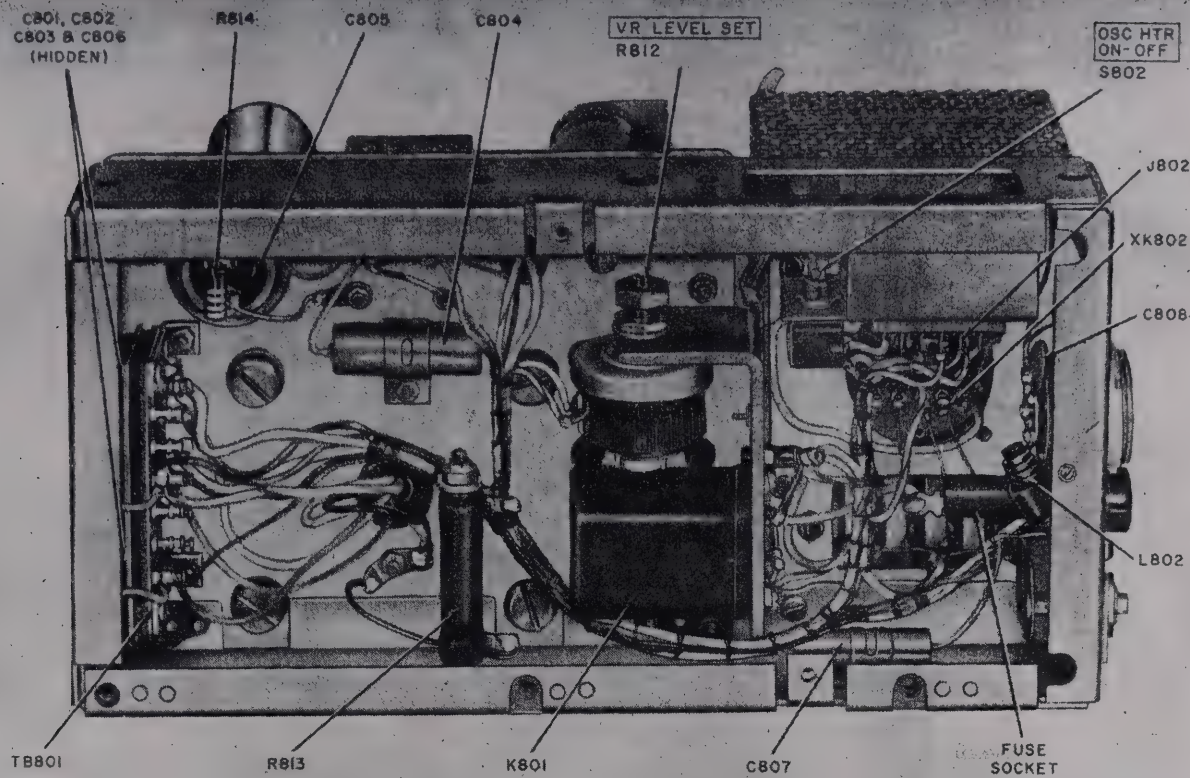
Dynamotor DY-80/URR, bottom view.
